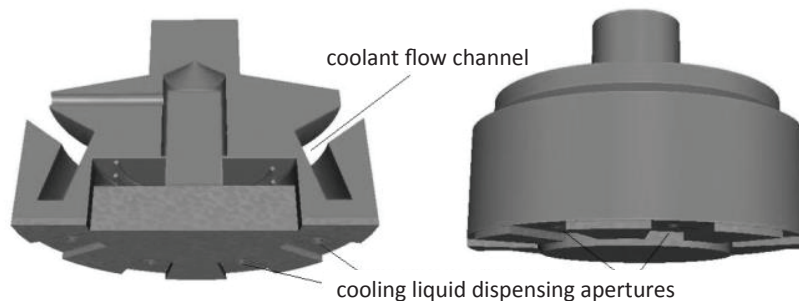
A view of abrasive body suitably designed to hold cooling liquid and to dispense it to grinding zone [8]
